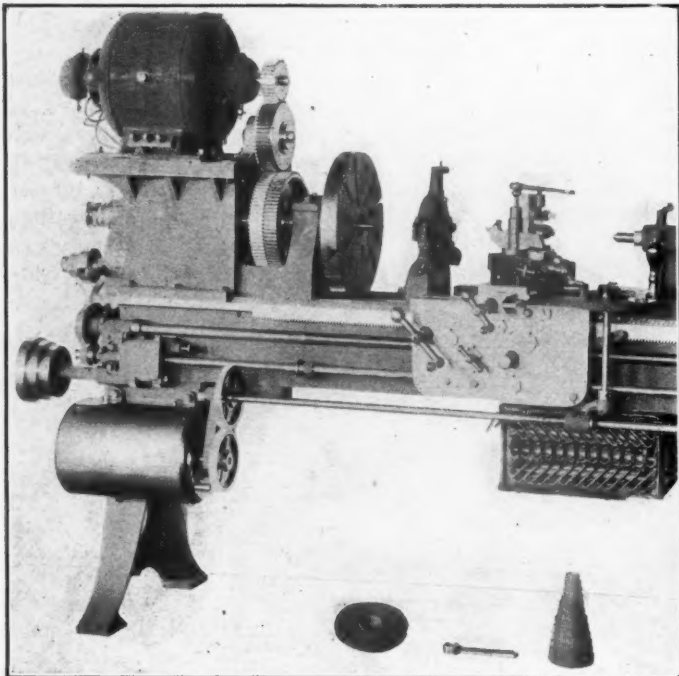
GEARED HEADSTOCK DRIVE UPON A 16-INCH BLAISDELL LATHE.—2 H. P. BROWNING VARIABLE-SPEED MOTOR.
